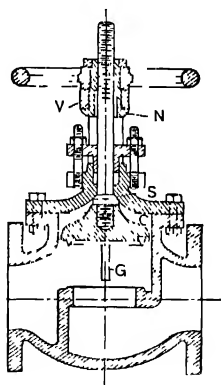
Typical Globe Valve, Bolt-top, Outside-screw.
